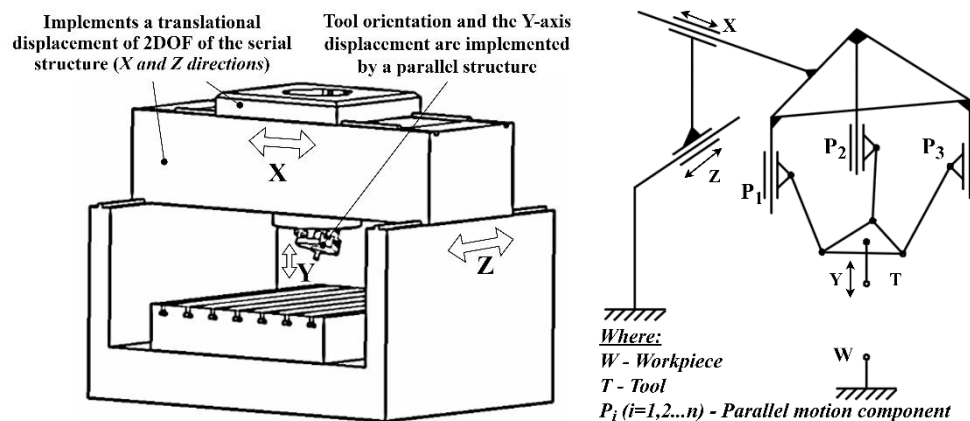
Sketch of hybrid structure and kinematic model of these machine tools [6]
